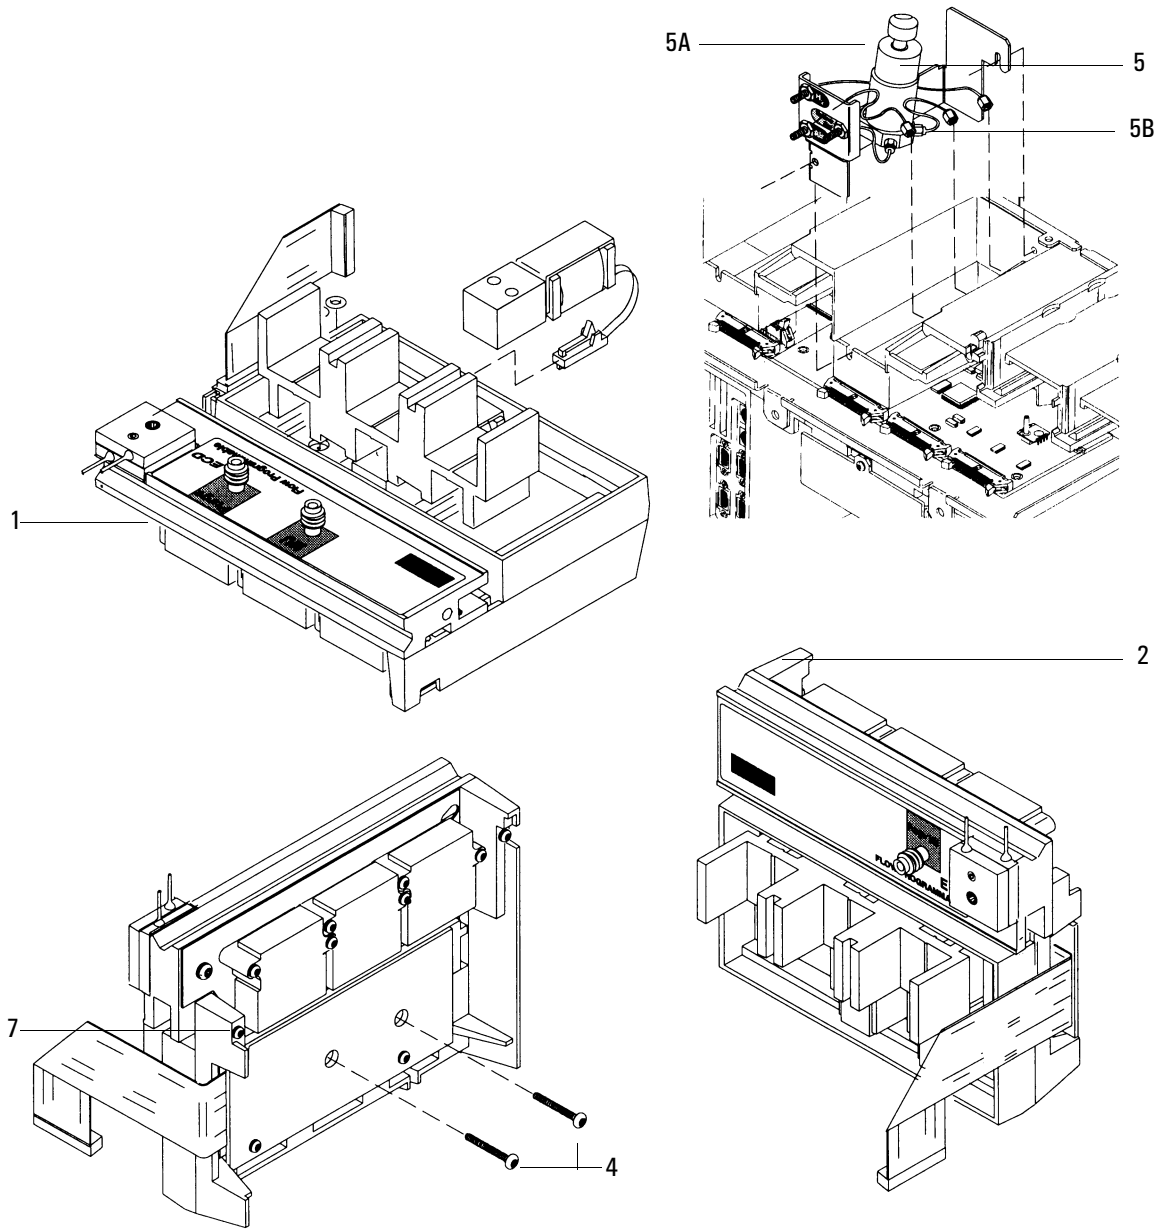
Electron Capture Detector (ECD) manifold assembly
